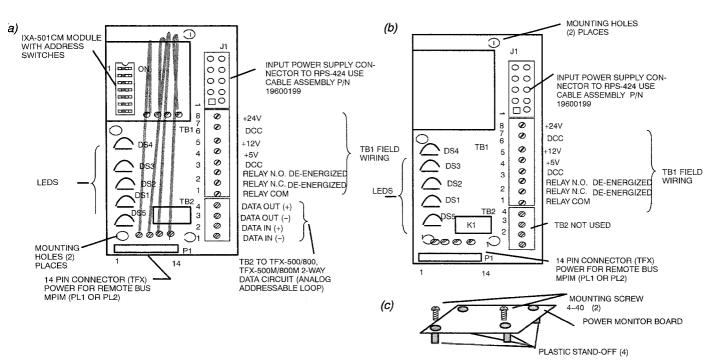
Power Supply Monitor Boards (a) 500PSM TFX Addressable Option Assemby No. 976122, P/N 900960, (b) PSM Power Supply Monitor Assembly No. 976123, P/N 900961, (c) Side view of mounting hardware.
